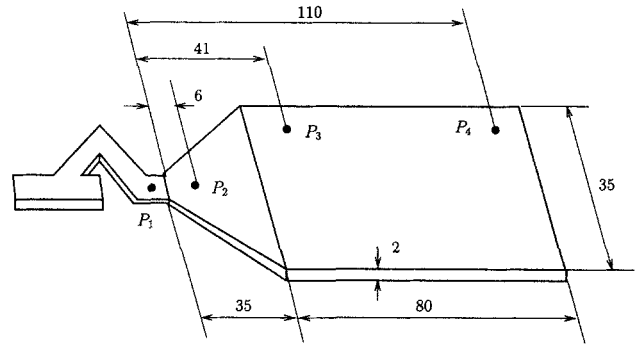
Flat strip mold A (PS) (dimensions are in mm).
